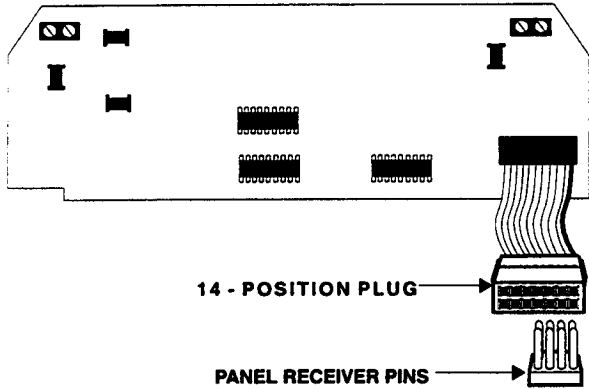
Connecting the Receiver Module Ribbon Cable to the Panel Pins
